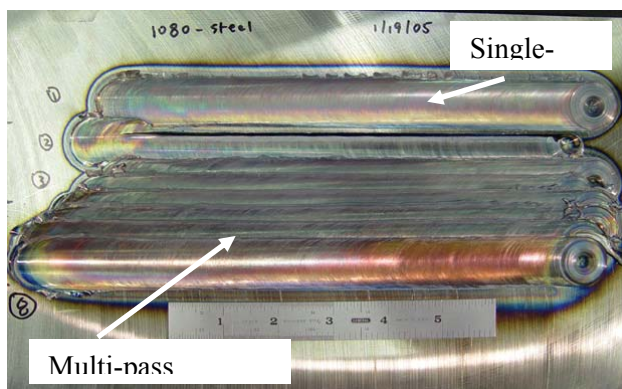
Photograph of a 1080 steel plate after single-pass and multi-pass friction stir processing.
